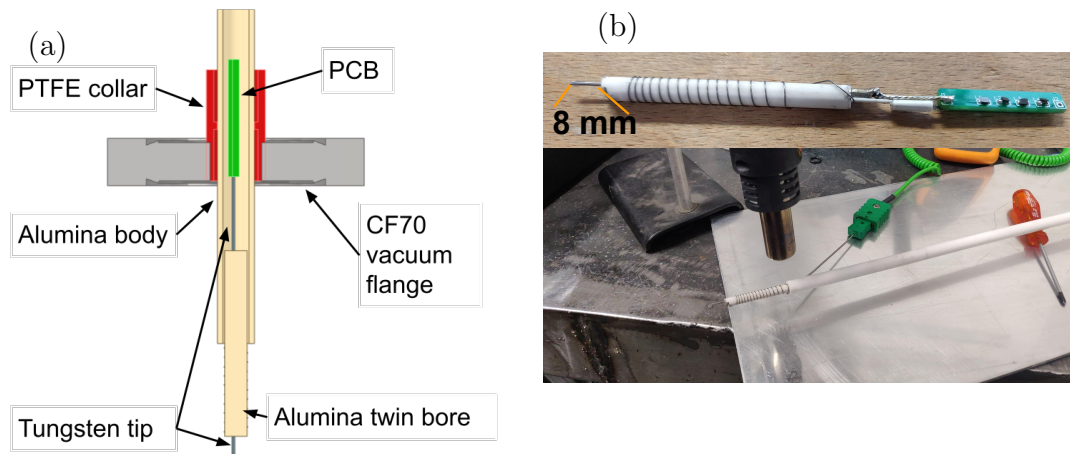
(a); CAD drawing of the probe tip and feed-through and (b); construction of the probe tip assembly.
